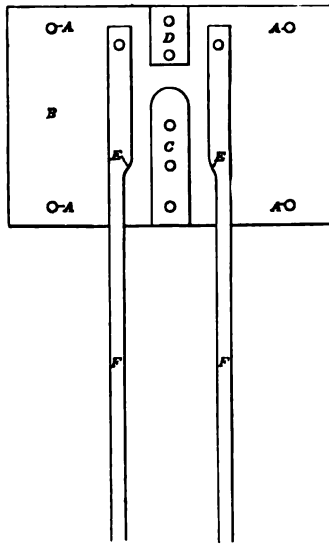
DEVICE FOR SHAPING CHUCK BOLTS.
